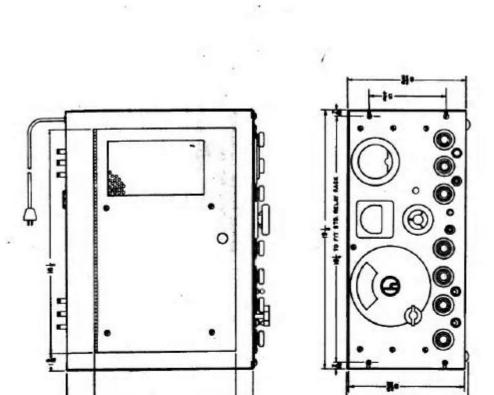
Radio Receiver Model 8-364, outline dimensions.
